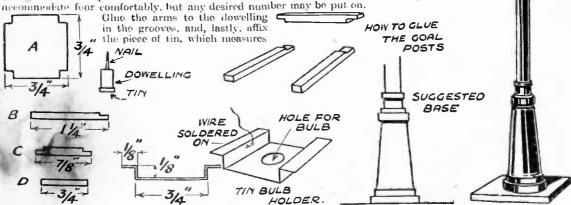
Constructional detail showing the various parts of the lamp-post; the completed lamp-post being shown on the right.
